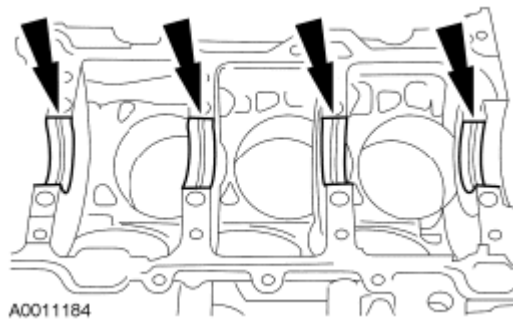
Locating Crankshaft Main Bearings From Cylinder Block
